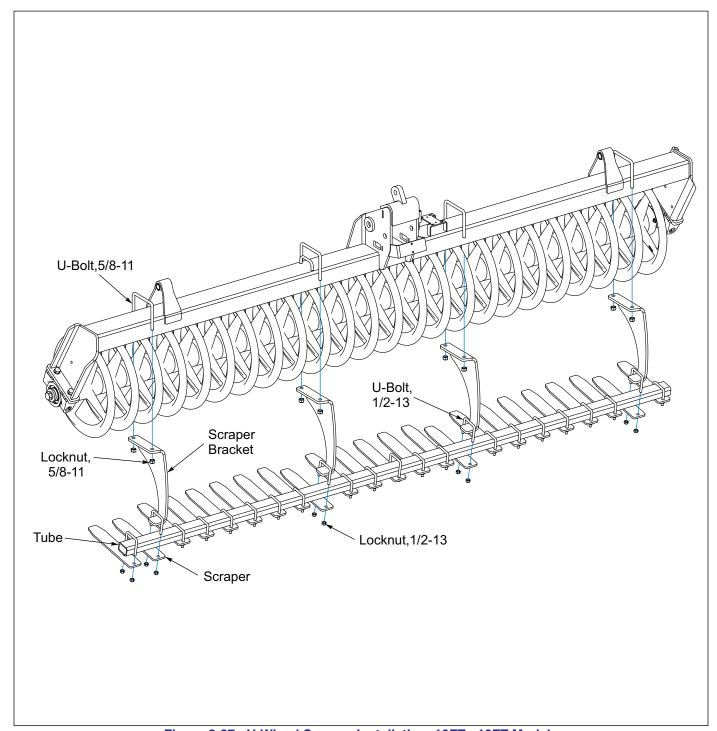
V-Wheel Scraper Installation, 10FT - 12FT Models
